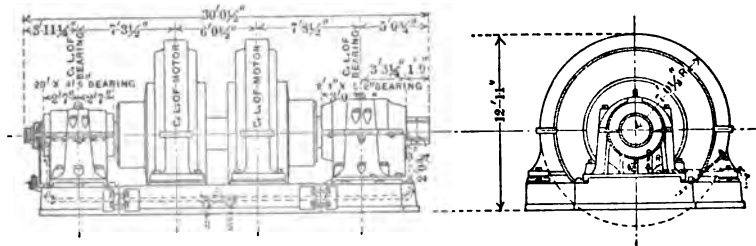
OUTLINE OF MOTORS FOR DRIVING MILL.
